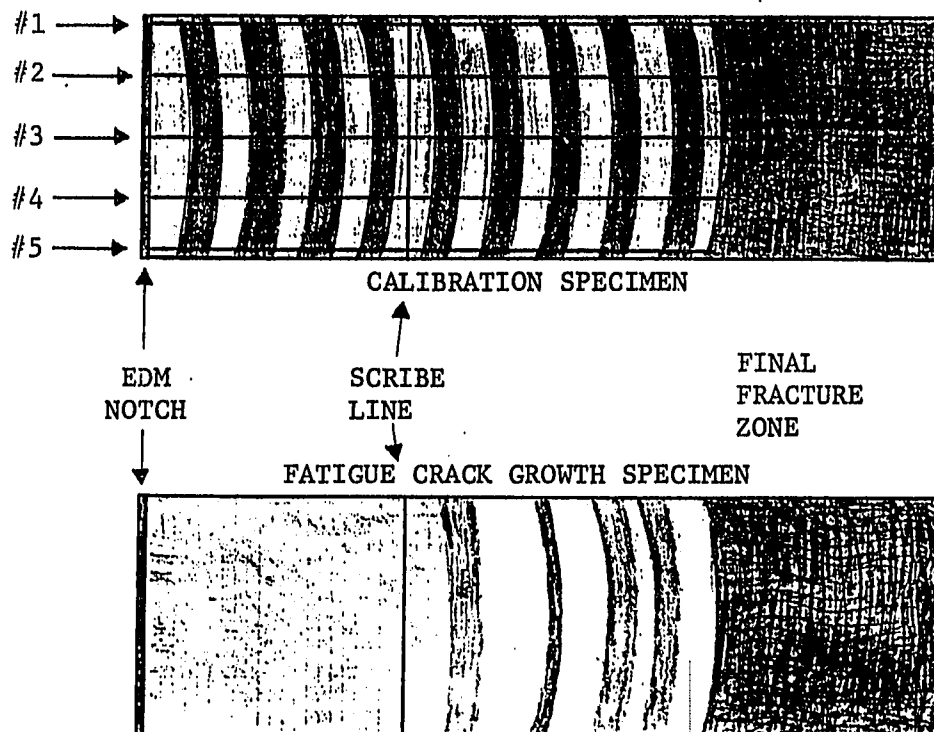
A schematic diagram of the calibration and FCG test fracture surfaces showing the distinct surface zones and the crack length measurement scribe marks.
